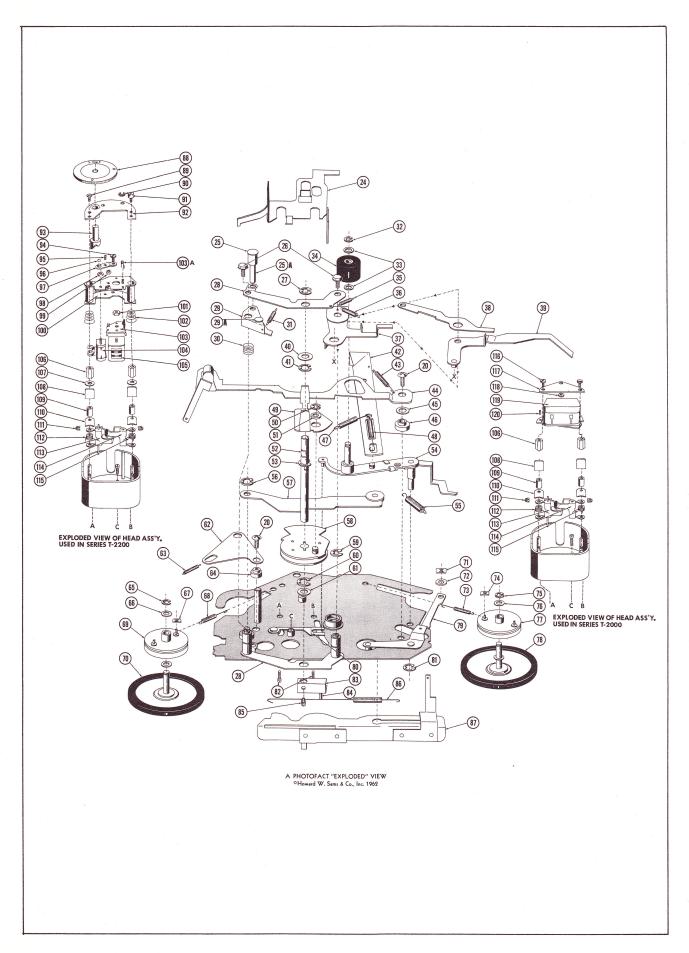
Exploded View of Top Mechanism Plate Assembly
